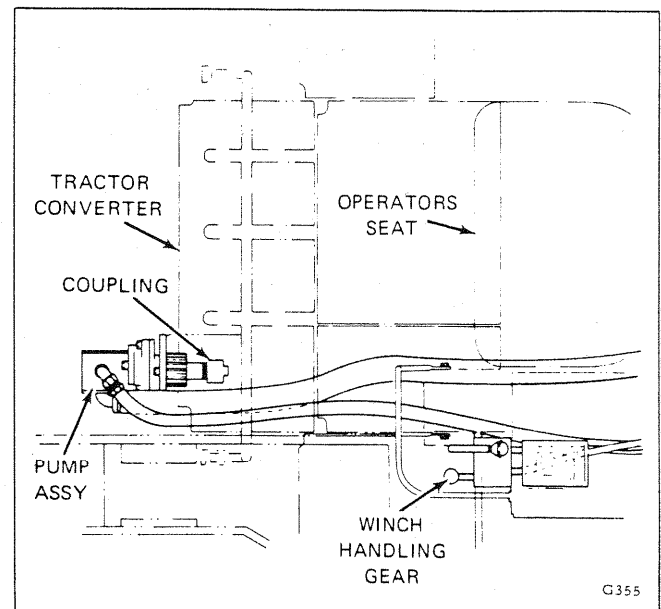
REMOVAL OF HYDRAULIC PUMP ASSEMBLY (977K TRAXCAVATOR SERIAL NUMBER 46H1 AND UP)
